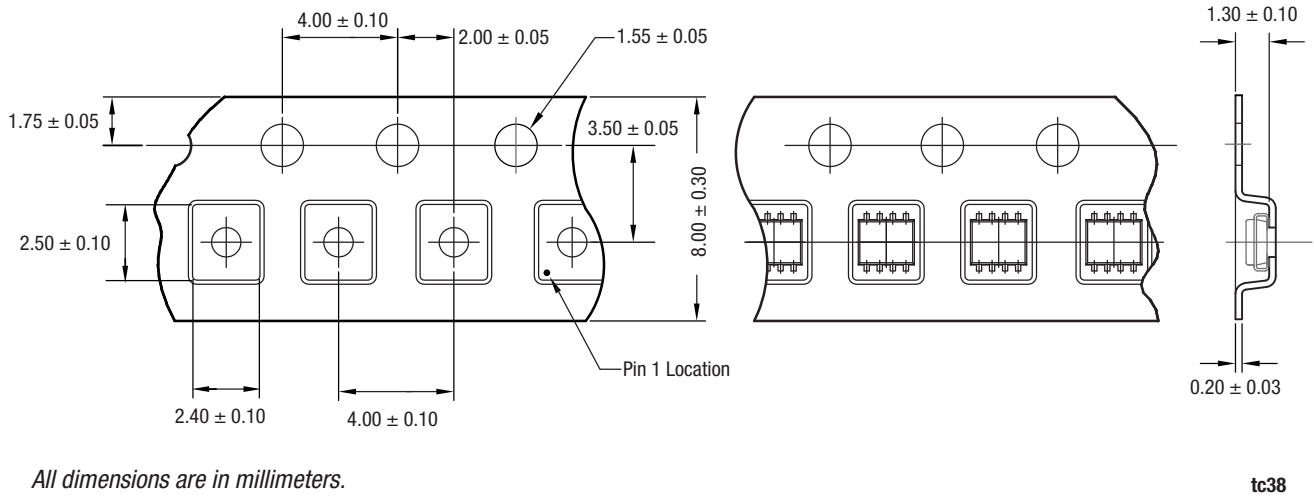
AAT4687-1 10-pin SC70JW Tape and Reel Dimensions
